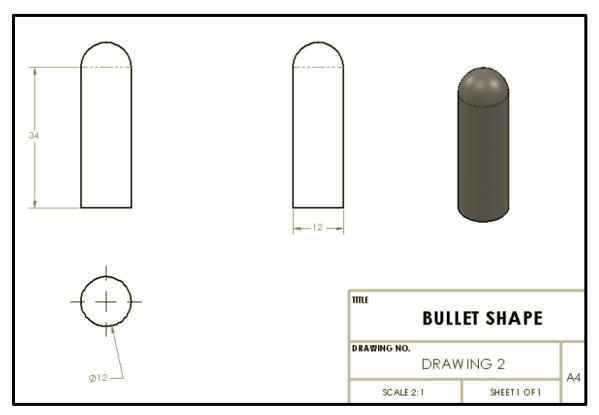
Bullet shape specimen design using Solid Work Software.
